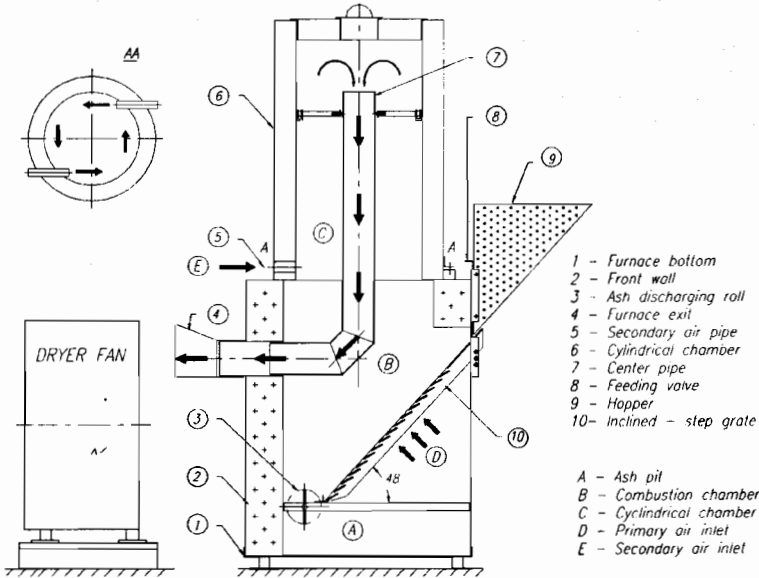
Furnace with Inclined Grate and Cylindrical combustion chamber (IGC)
